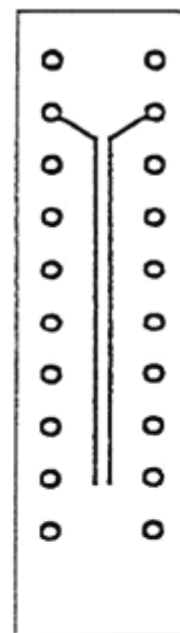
Test Coupons (for Multilayer Printed Wiring Board) (2/3)
